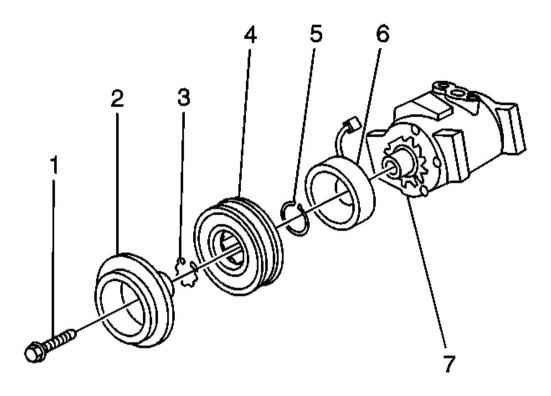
Exploded View Of Compressor Clutch Plate Assembly Courtesy of GENERAL MOTORS CORP.
